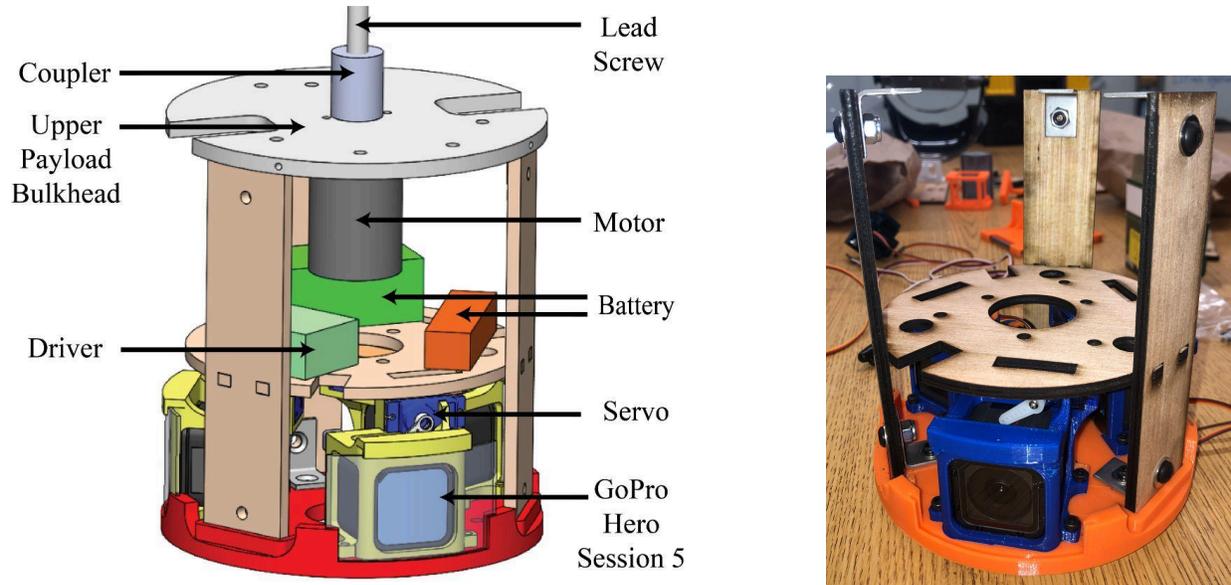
Camera Bay CAD (Left), Camera Bay Manufactured (Right)
